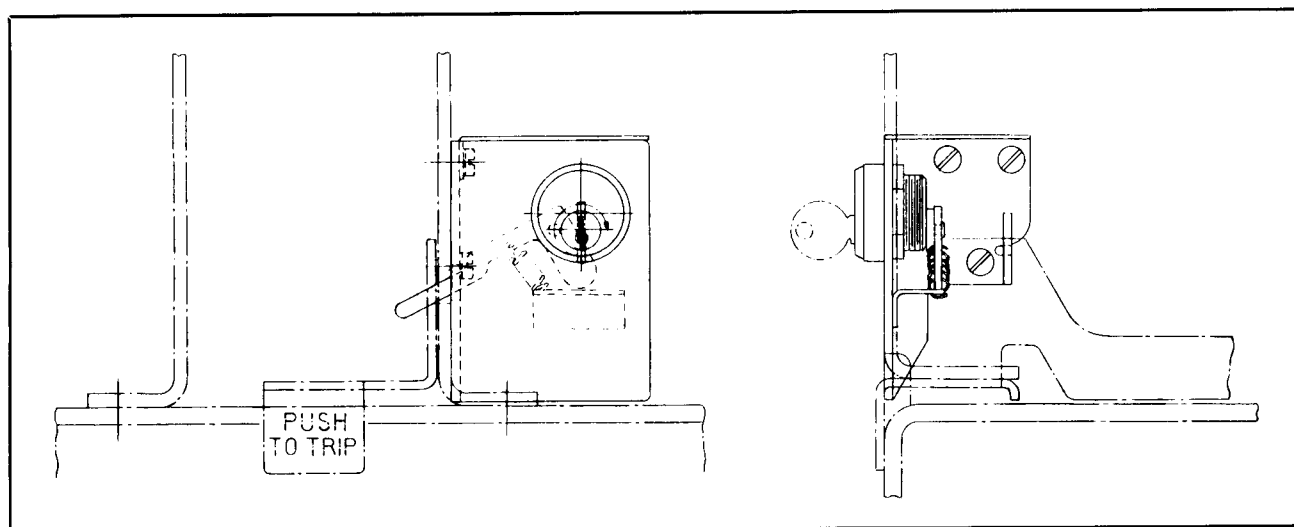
Key Lock or Key Interlock Attachment—Construction Details
